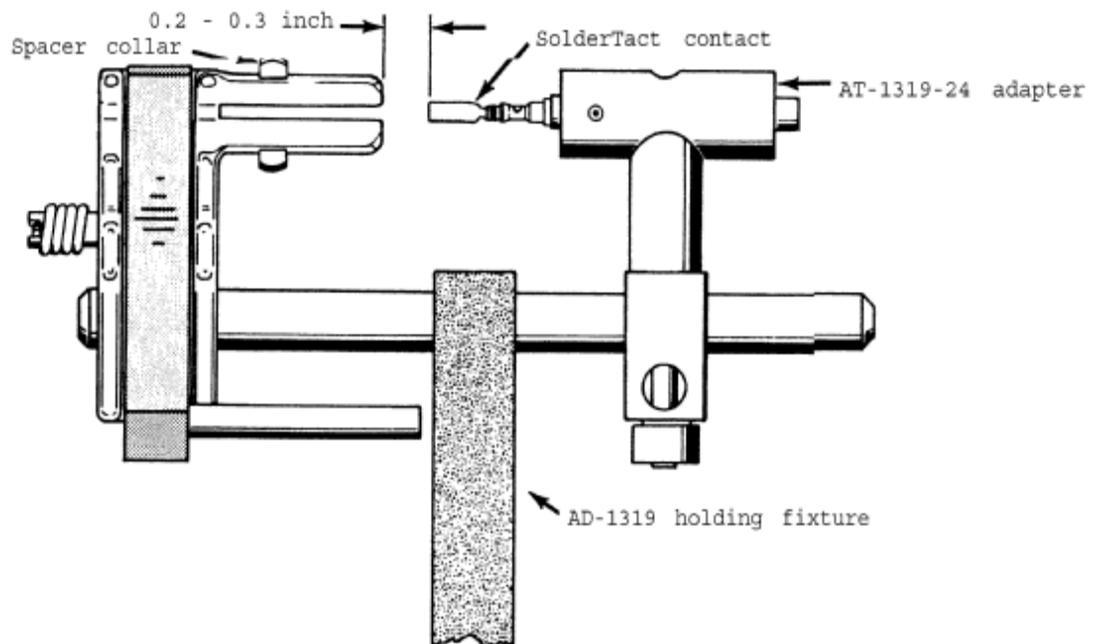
Setup Dimensions for AD-1319 Holding Fixture
